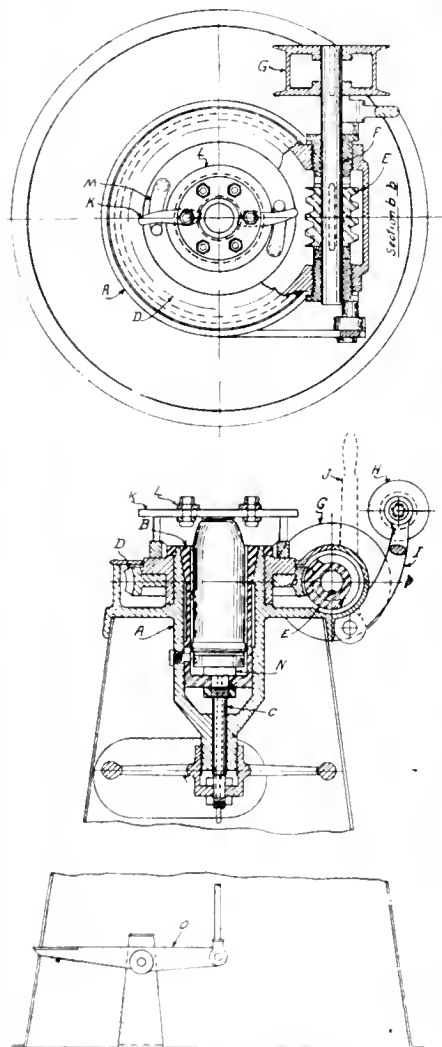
SPECIAL APPARATUS FOR SCREWING IN BRASS SOCKETS.
